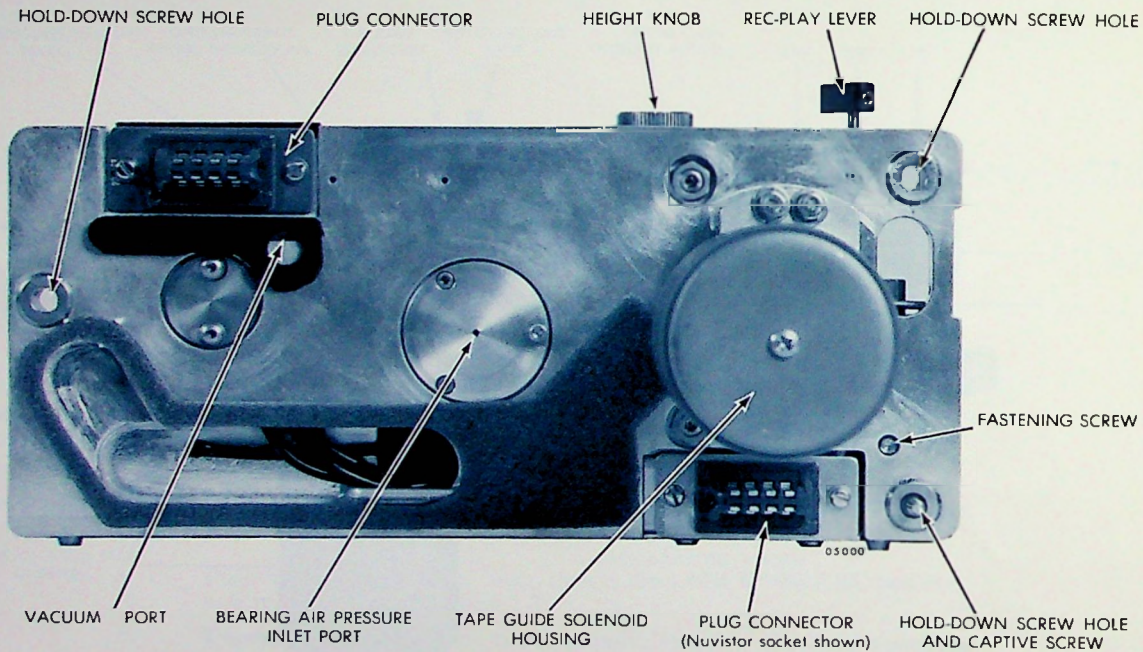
Bottom View of the Mark Ten Video Head Assembly
